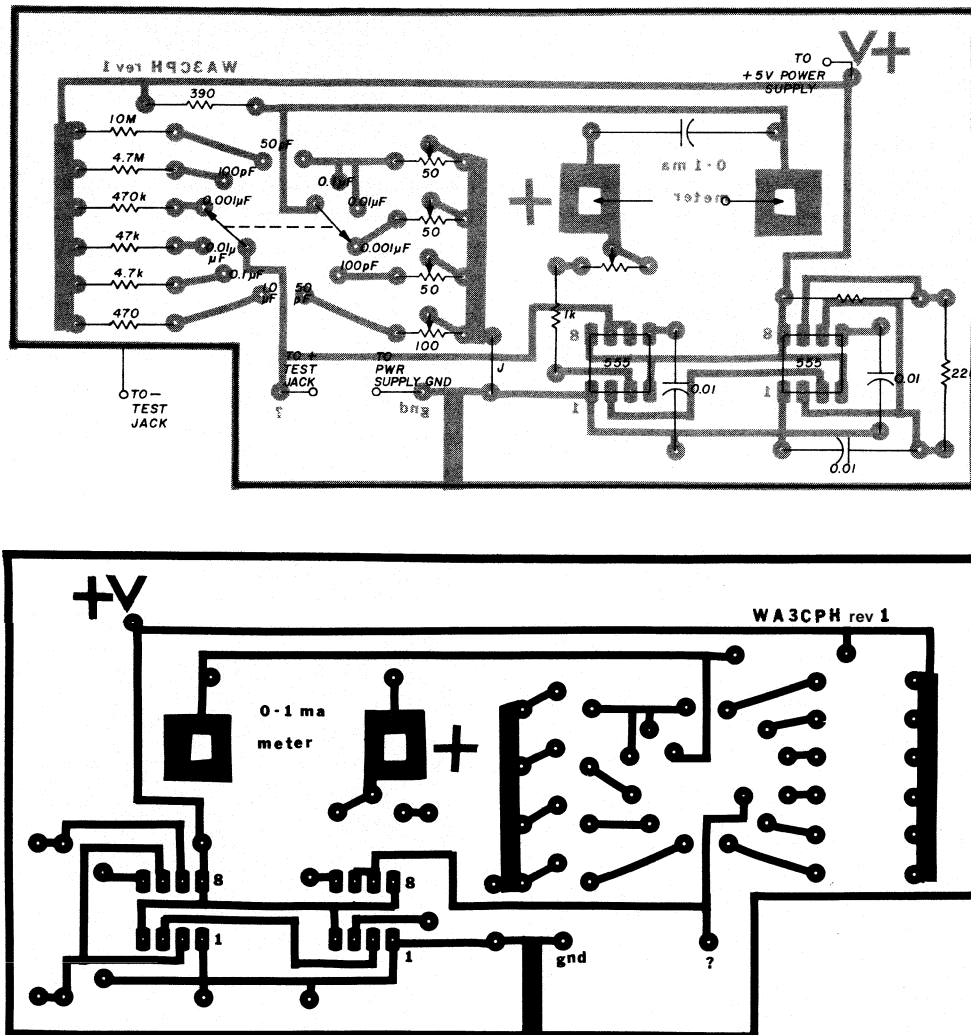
Component layout for the cap meter. above. Foil side of PC board, below.
